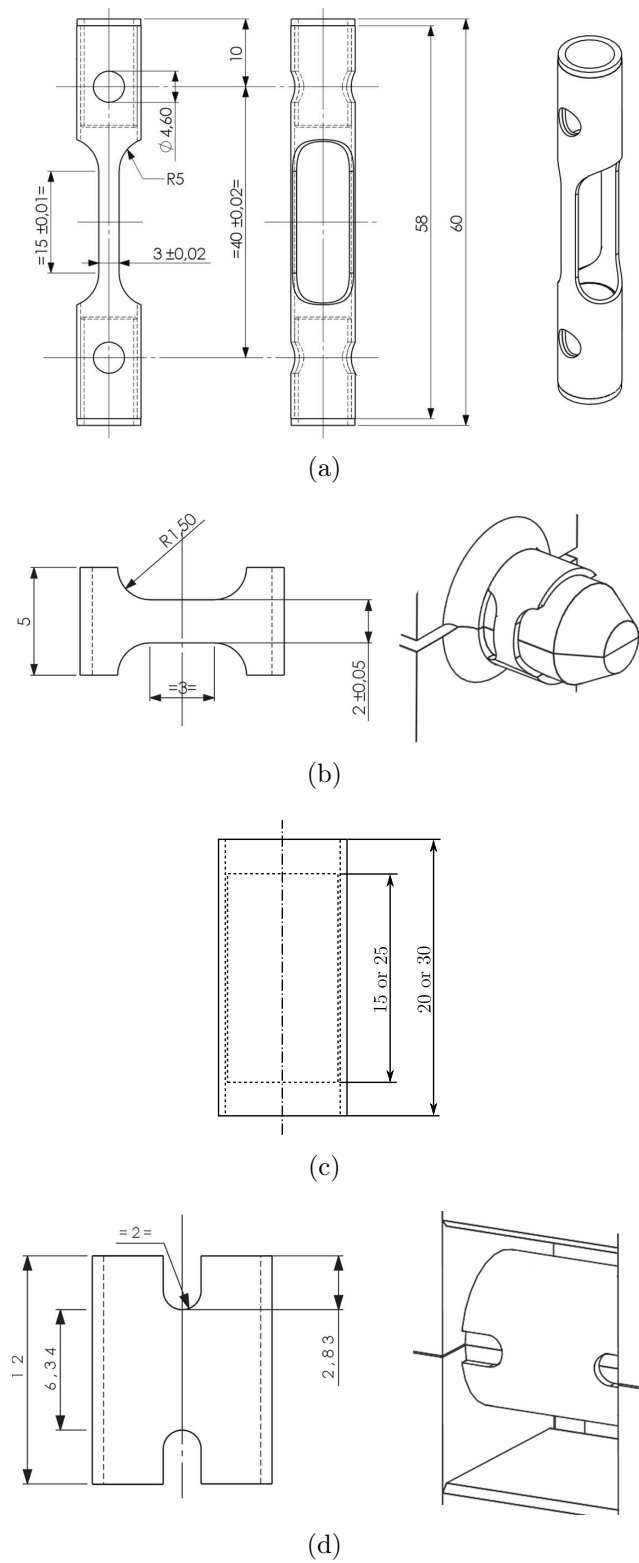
(a) AT specimen, (b) HT specimen, (c) EDC specimen and (d) PST specimen.
